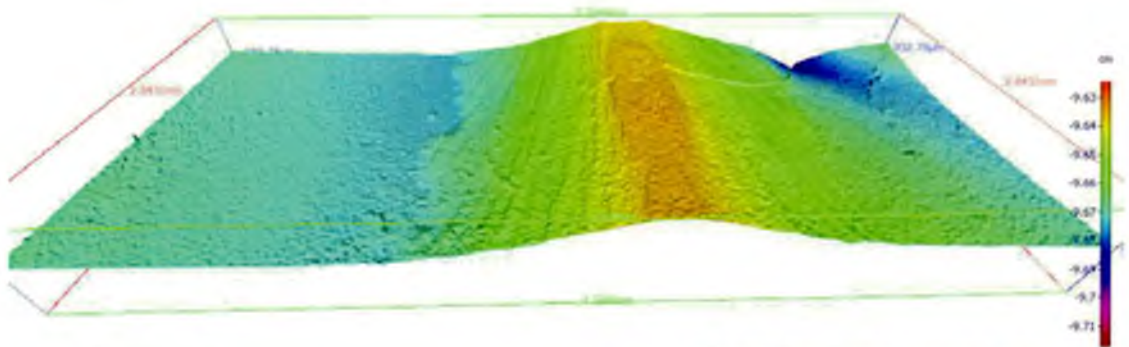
IFM 3D surface image and surface profiles for the front of the weld bead of sample F4.8.3
